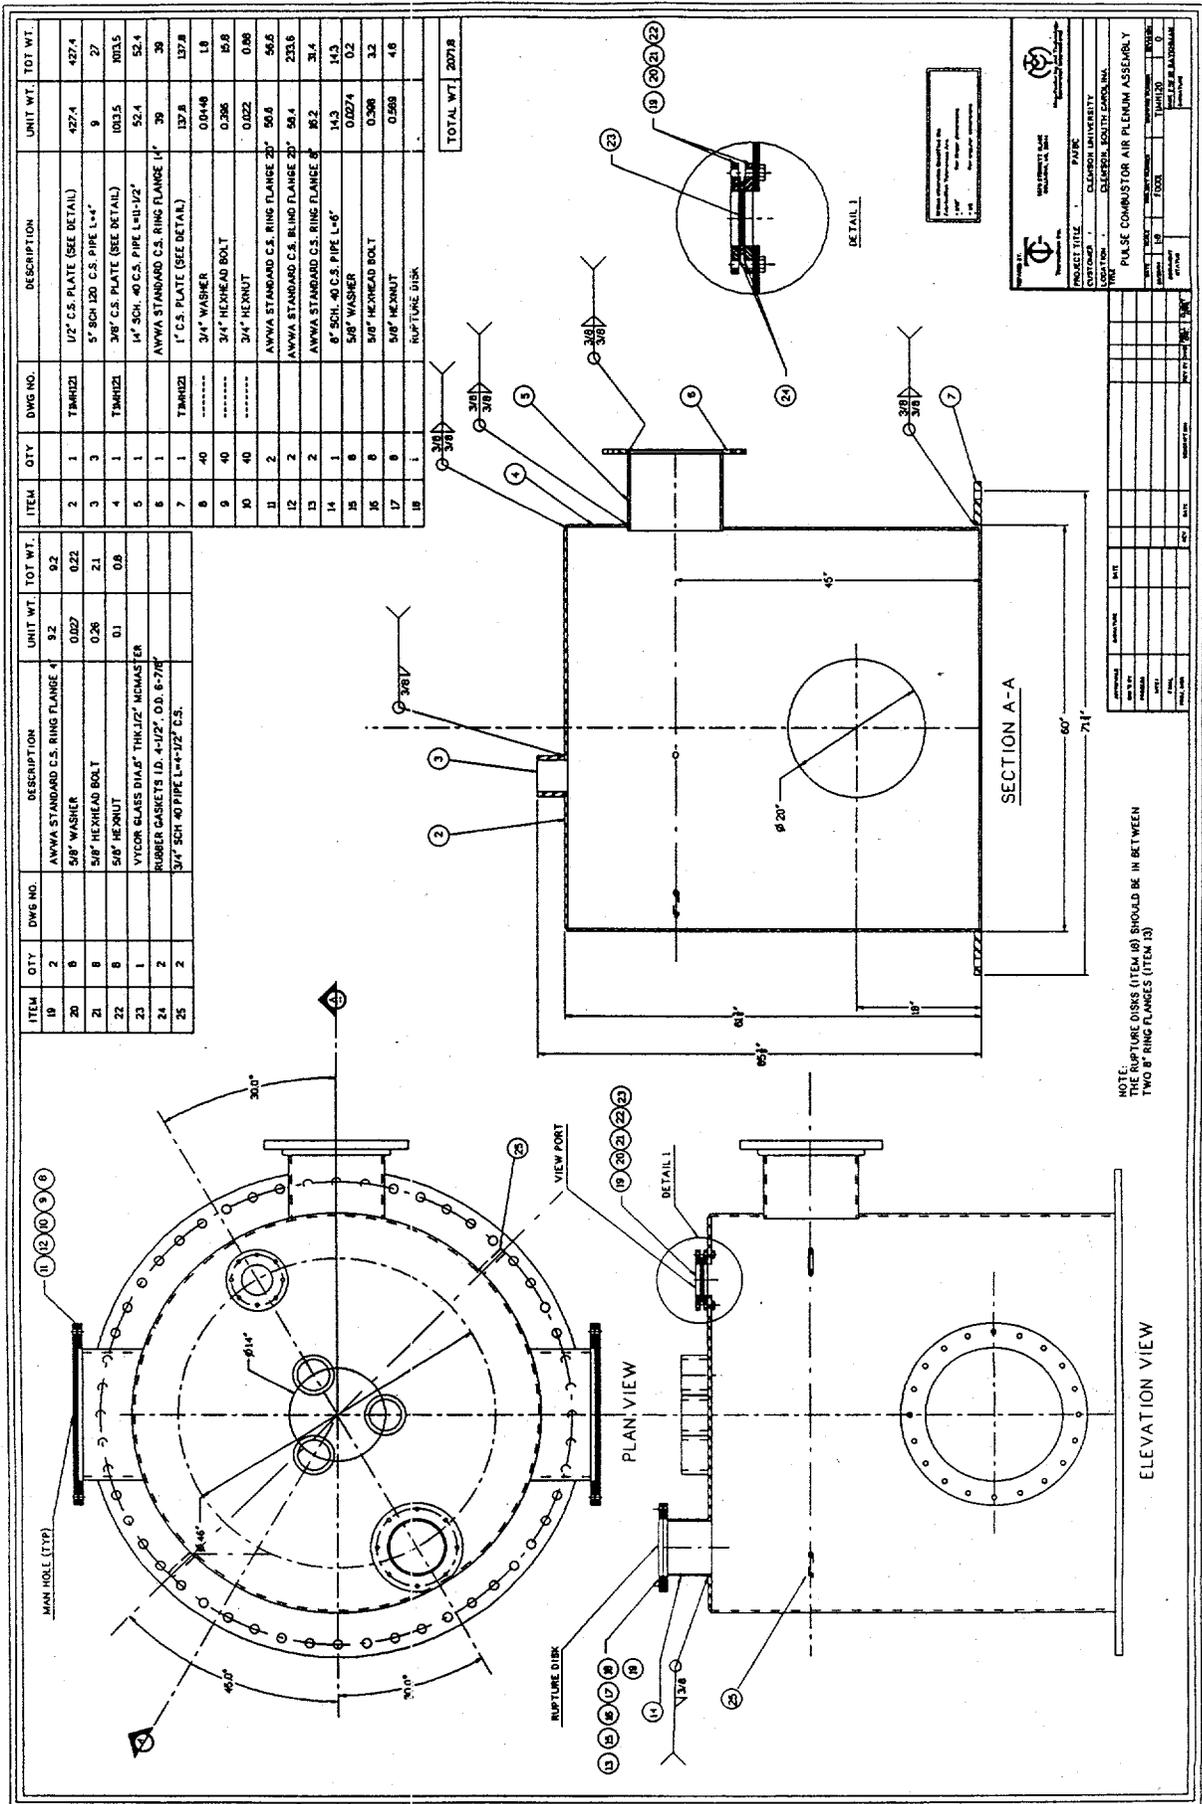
PULSE COMBUSTOR AIR PLENUM ASSEMBLY
